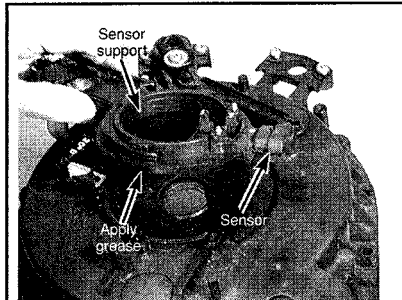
Lubricate the sliding surfaces of the sensor before installation
